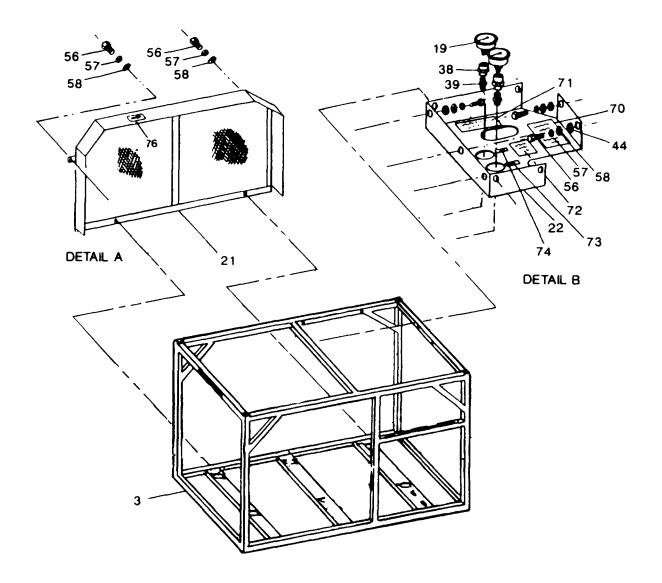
Air Compressor, Diesel Engine Driven (Sheet 2 of 2)
